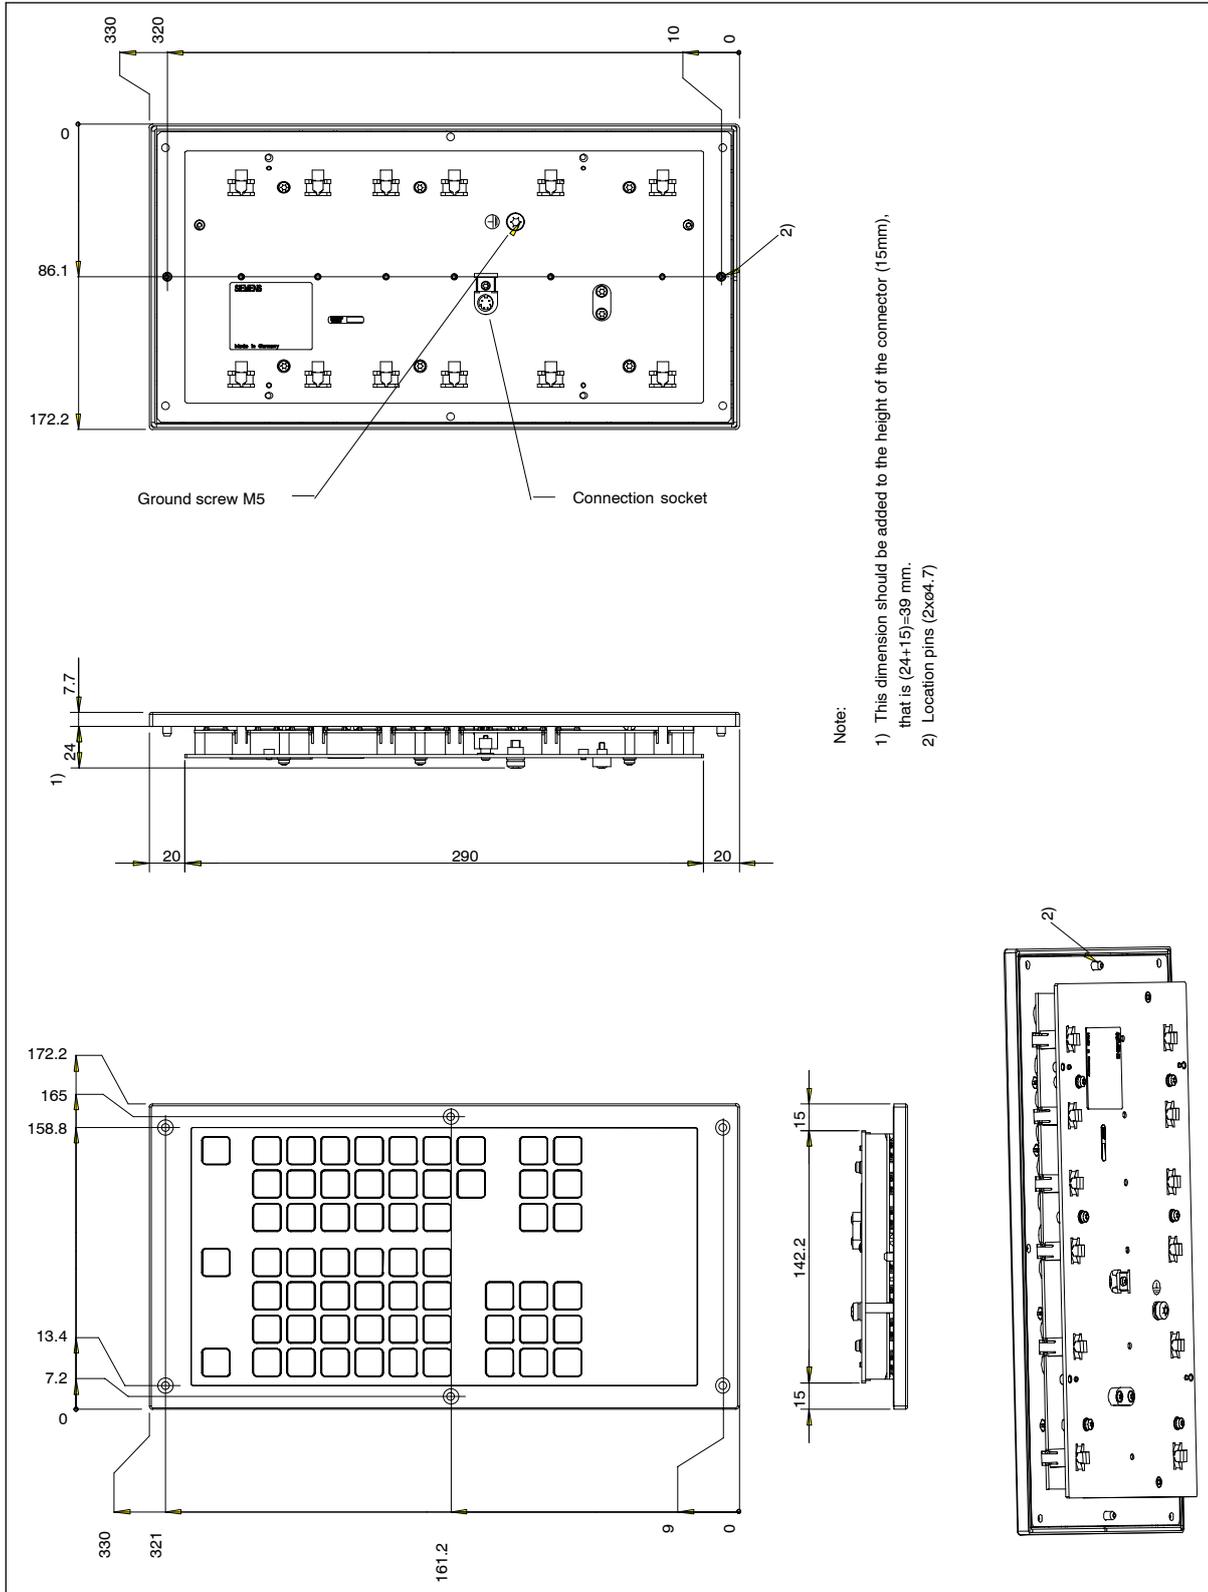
Mounting dimensions for the keyboard (vertical layout for installation alongside the PCU)
